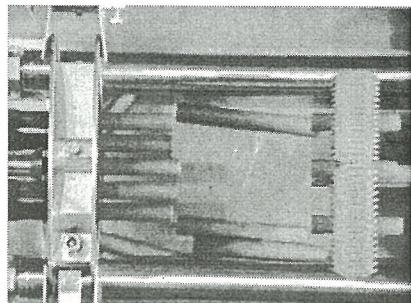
Cutting view of PLUS7 guide tubes.
